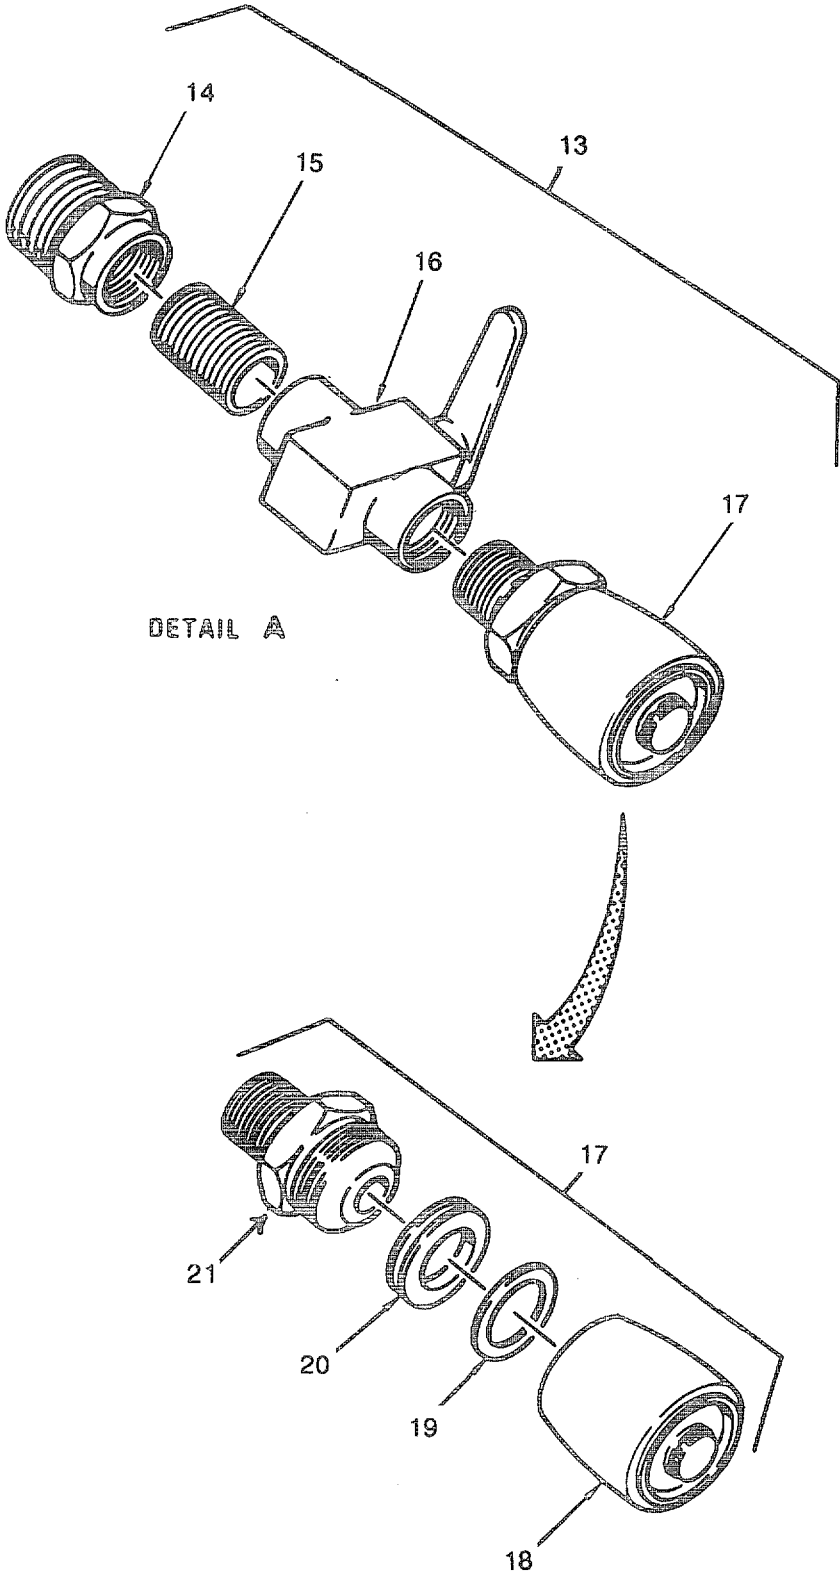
Shower Stand Assembly (Sheet 2 of 2).
